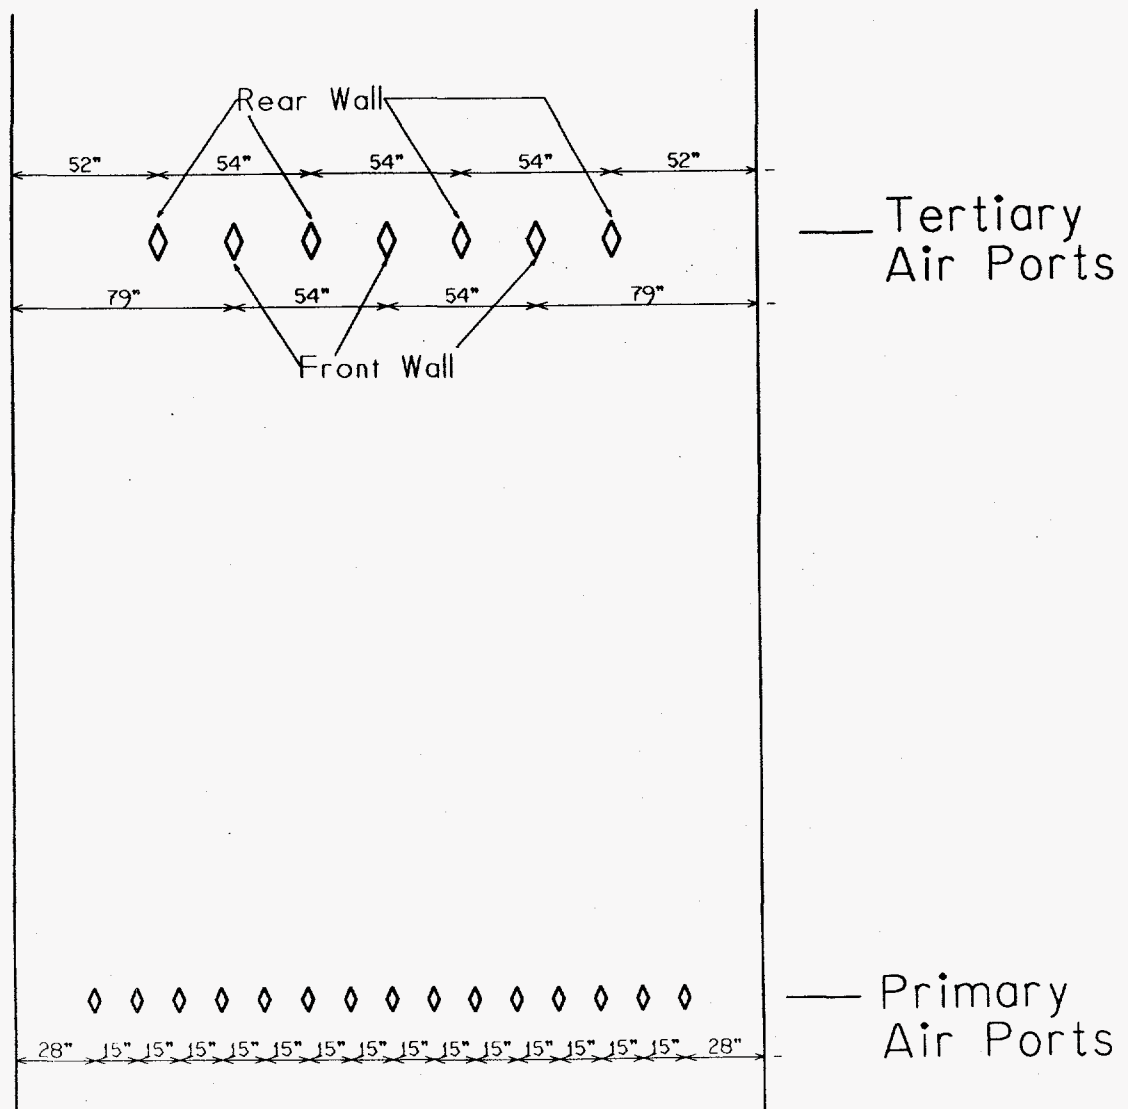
Air Port Arrangement - Front Elevation Lower Furnace
